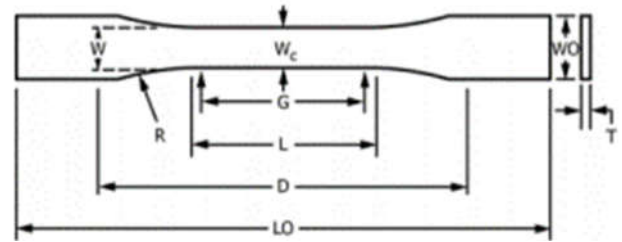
ASTM D638 Tensile Test Specimen Dimensions [20].
